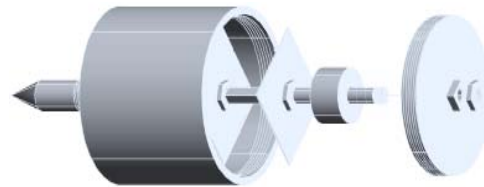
3-D exploded view of the mechanical components of the vibrometer
